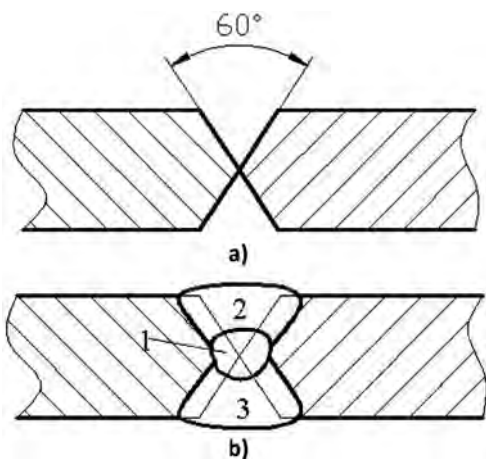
The schematic drawing of: (a) weld preparation (double-V joint design) and (b) sequence of welds.
